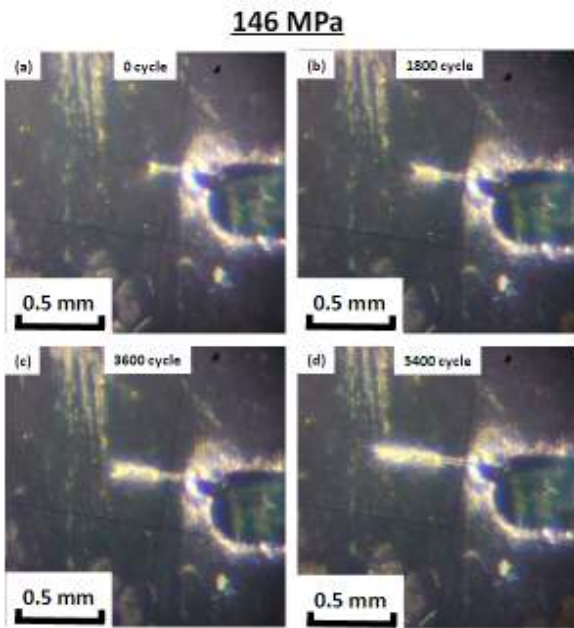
Photographs of fatigue crack of 146MPa.
